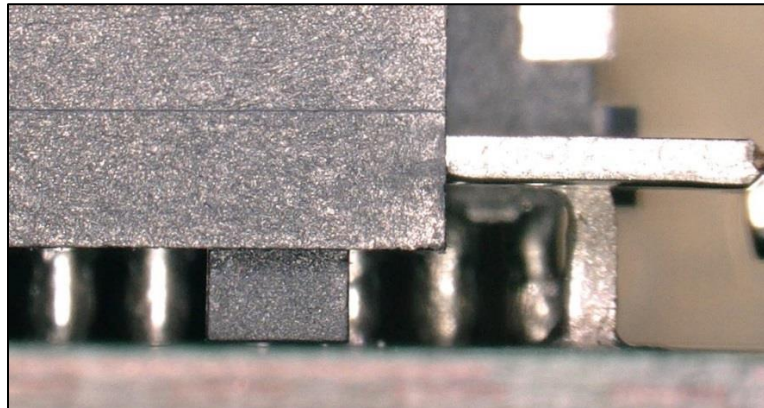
The insulator housing of a reflowed SEAF8-RA connector will rest on the board surface or slightly above.
